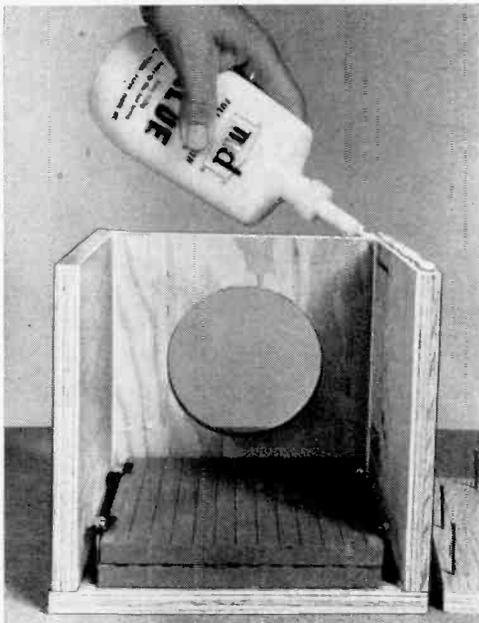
Top should be last wall mounted to speaker mounting board. Note, at far right, nails partially driven into top wall to facilitate assembly.
